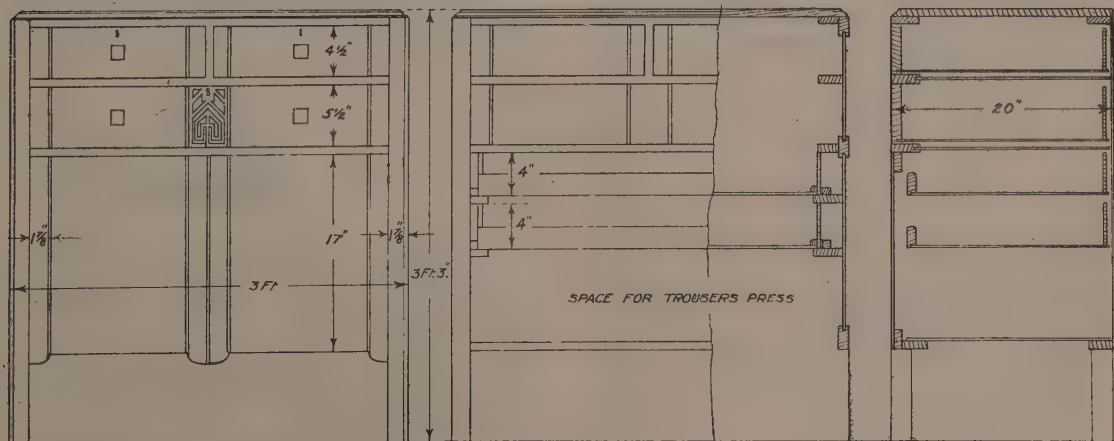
FRONT ELEVATION WITH SIZES, INTERIOR VIEW AND SECTIONS.
